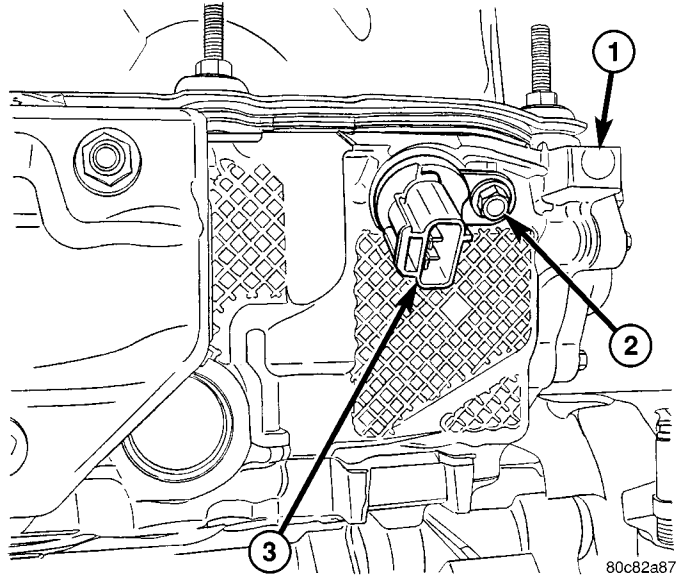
CAMSHAFT POSITION SENSOR (CMP) - 3.7L
